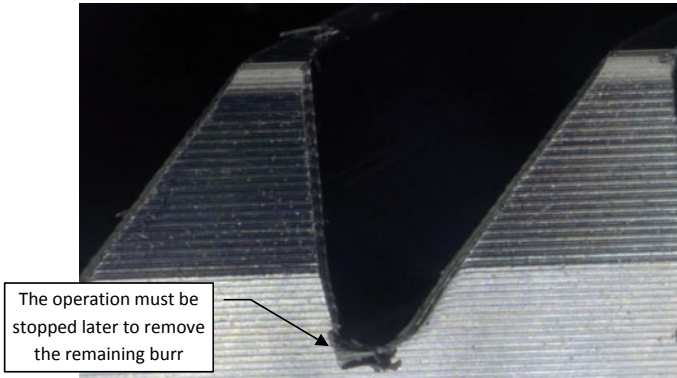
Sample Heel chamfer—large pitch cone angle spiral bevel gear
